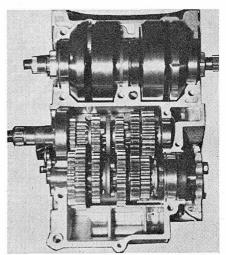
View of upper crankcase with transmission gears and crankshaft in position.
